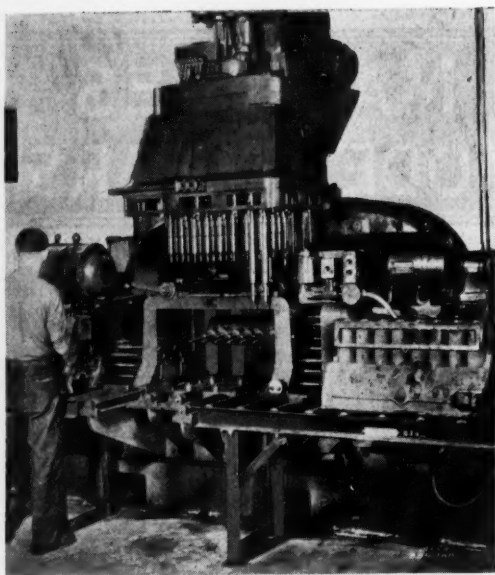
The cylinder blocks are moved from the conveyor directly into the fixture on the machine table.
